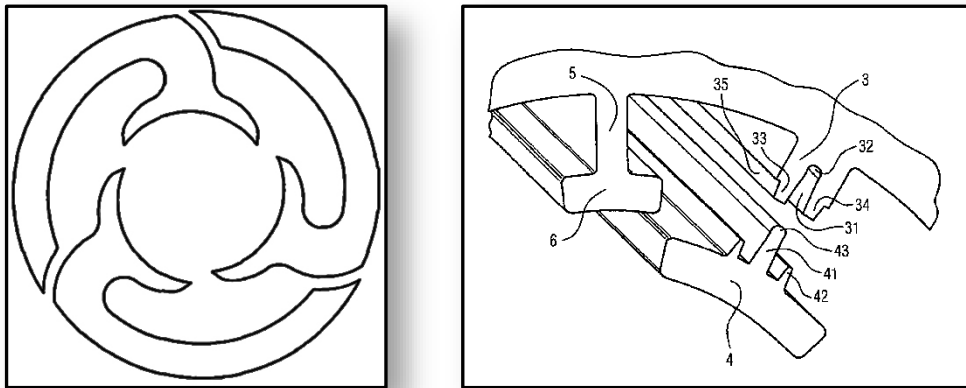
Examples of rotors with segmented [67] (left), and removable tooth geometry [68] (right).
